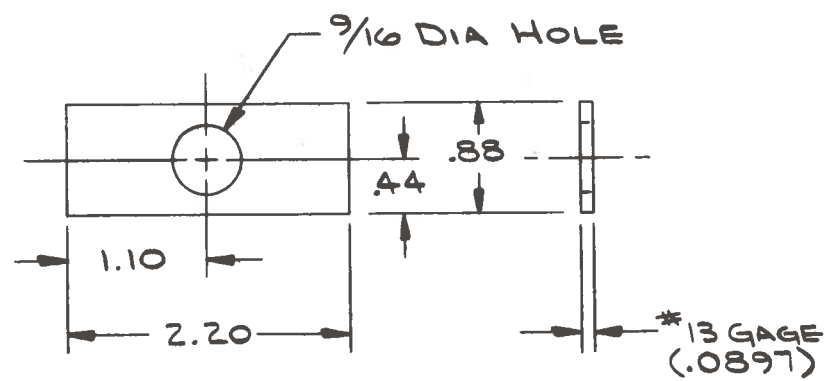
SIDE PANEL MOUNTING FLANGE REINFORCEMENT
